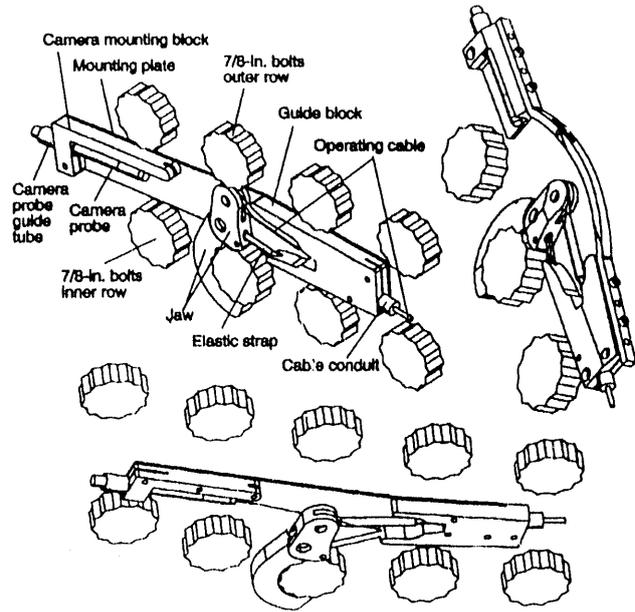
TF casing bolt tool assemblies: 7/8-in. bolt inner row tool (top left), 7/8-in. bolt outer row tool (bottom), 1-in. bolt tool (top right)
